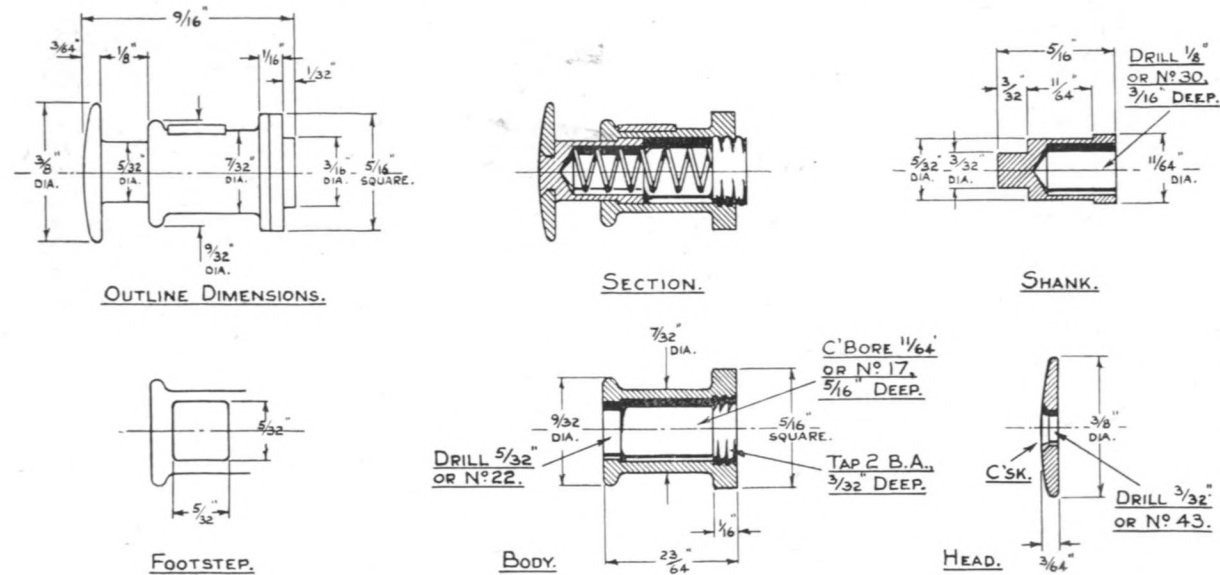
Buffer details. Outline dimensions for solid buffer, sectional view of complete spring buffer and dimensions of components.
